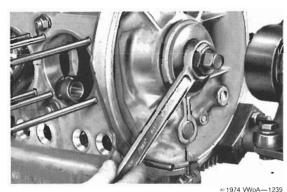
Seal being installed in single-carburetor engine with tool VW 2046. A similar tool can be made with an M 28 × 1.5 bolt, a nut, washers, and a steel disk.
